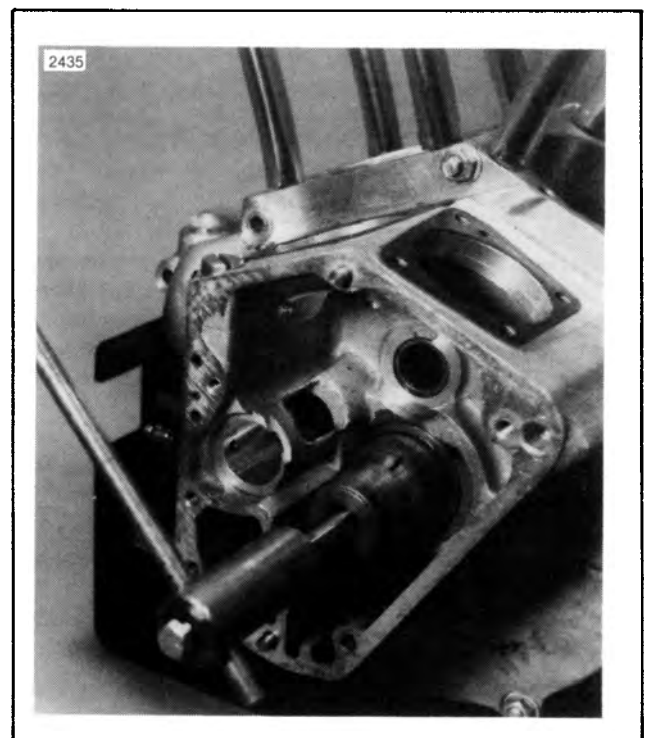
Lapping Pinion Shaft Main Bearing Race
